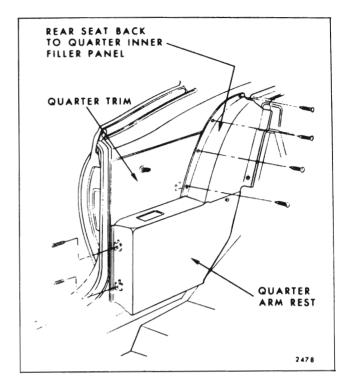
Quarter Trim Assembly - "F-37" Styles Only
